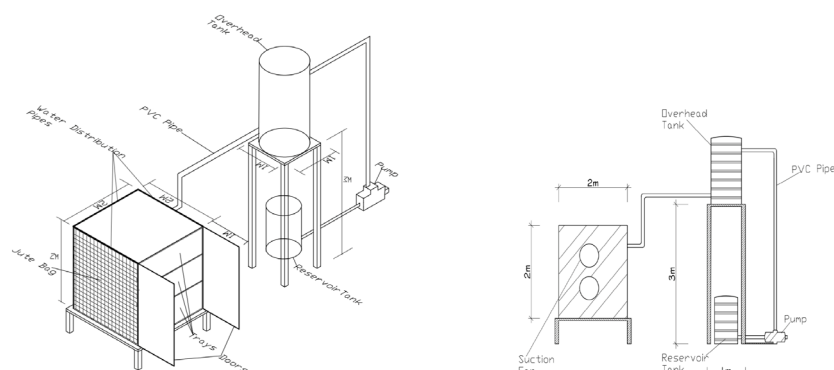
Isometric drawing of the fabricated evaporative cooling system
